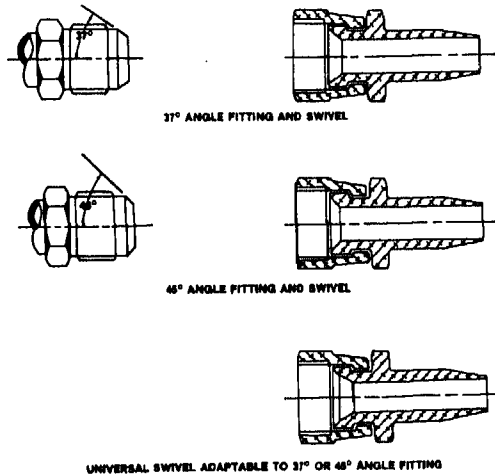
Wire braid hose fitting and swivel angles
